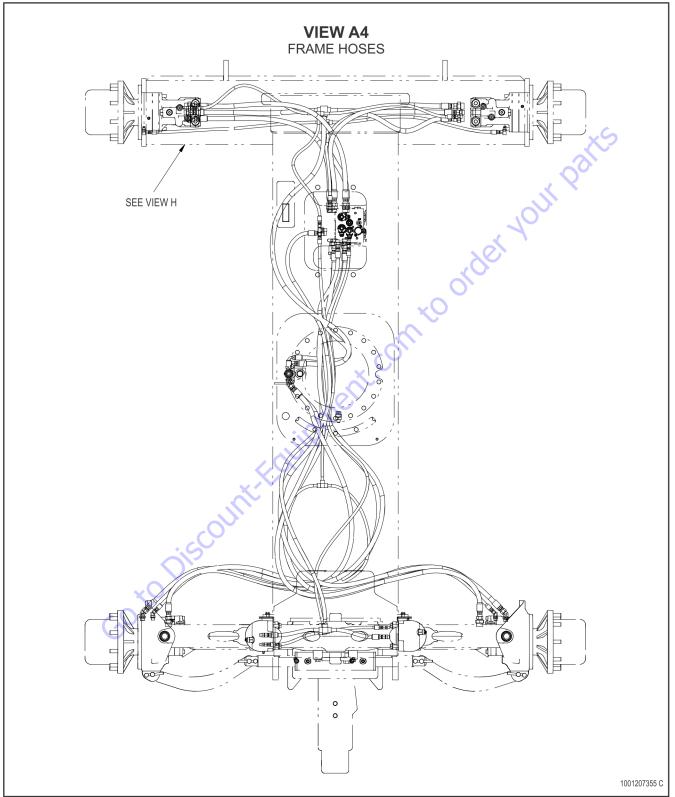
Hydraulics Installation - Sheet 10 of 28
